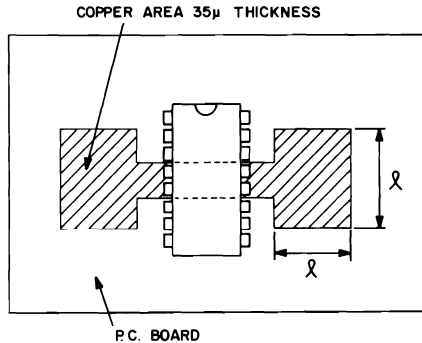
Fig. C - Example of P.C. Board Copper Area which is used as Heatsink
